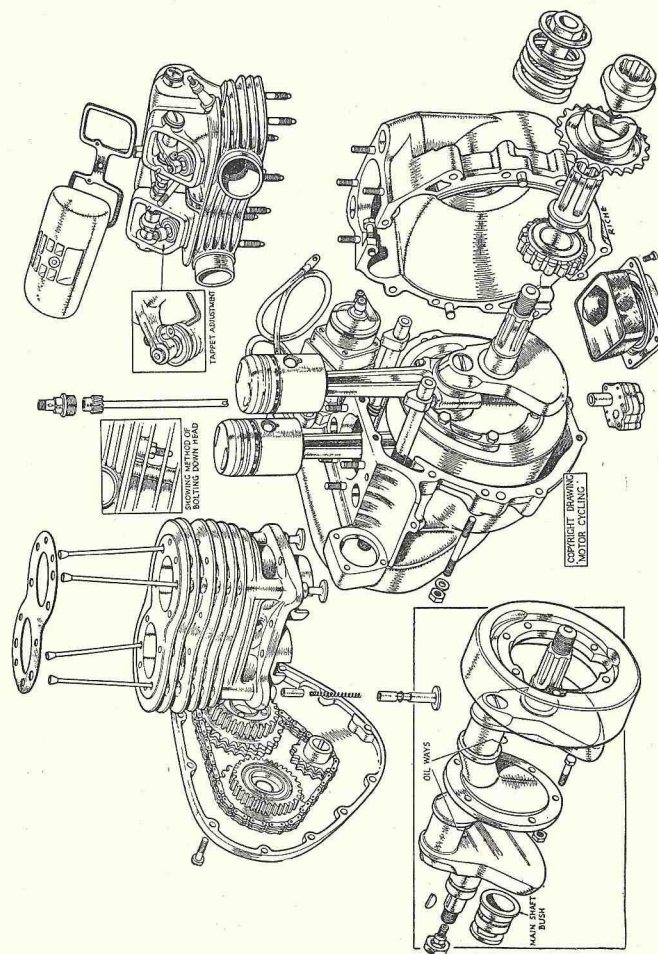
EXPLODED VIEW OF 500-C.C. TWIN-CYLINDER MODEL.
